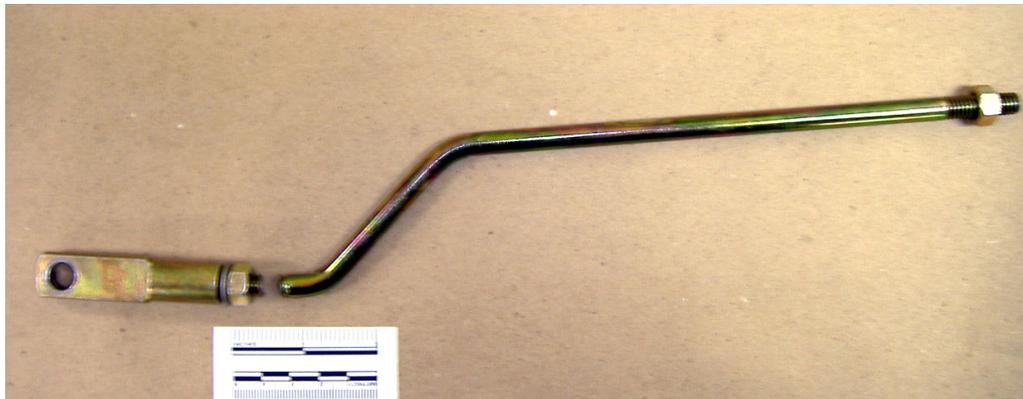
Failed Mechanism Operated Contact Linkage Arm
